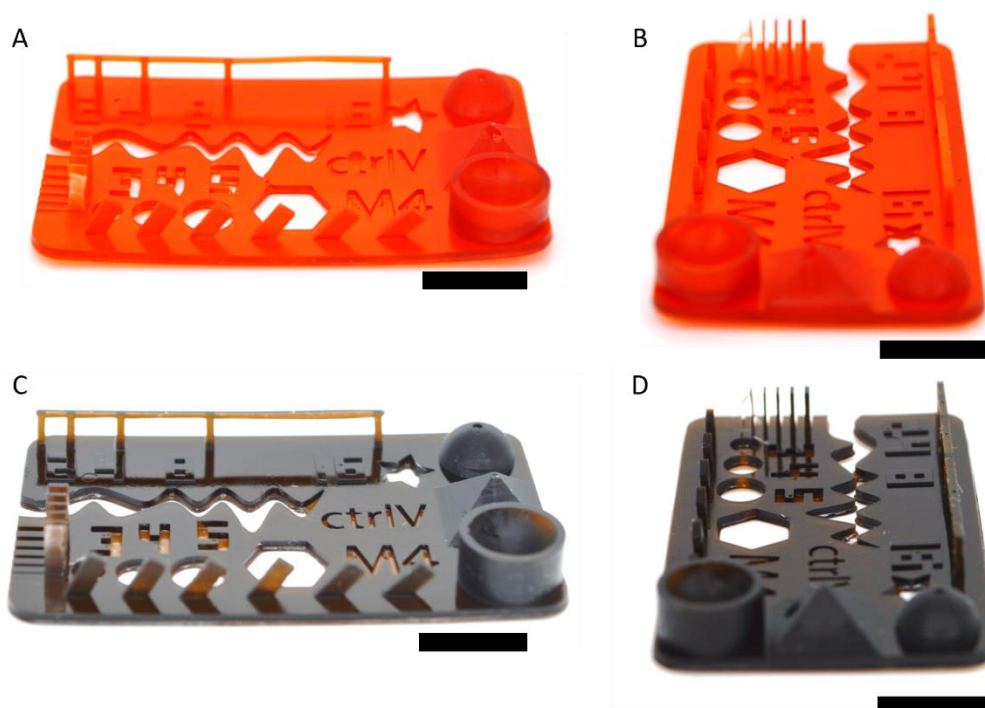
Resolution test prints of F3 and F4 resin printed with a commercial 3D printer. A) F3 front view of test print. B) F3 side view of test print. C) F4 front view of test print. D) F4 side view of test print.
